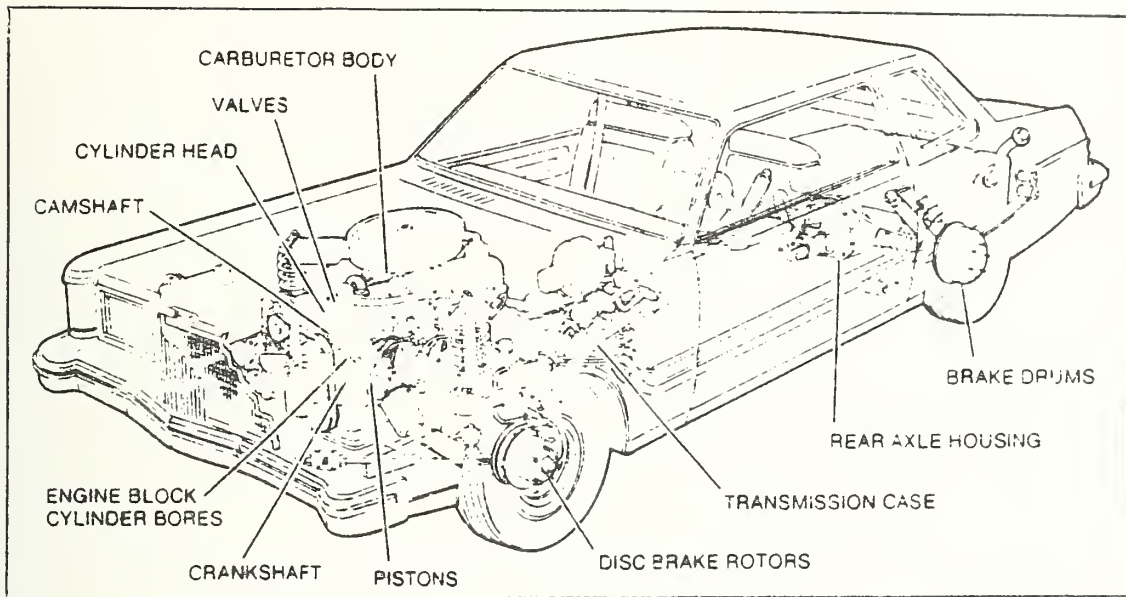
SCHEMATIC DIAGRAM OF AUTOMOBILE SHOWING PARTS AND COMPONENTS WHICH ARE MACHINED
